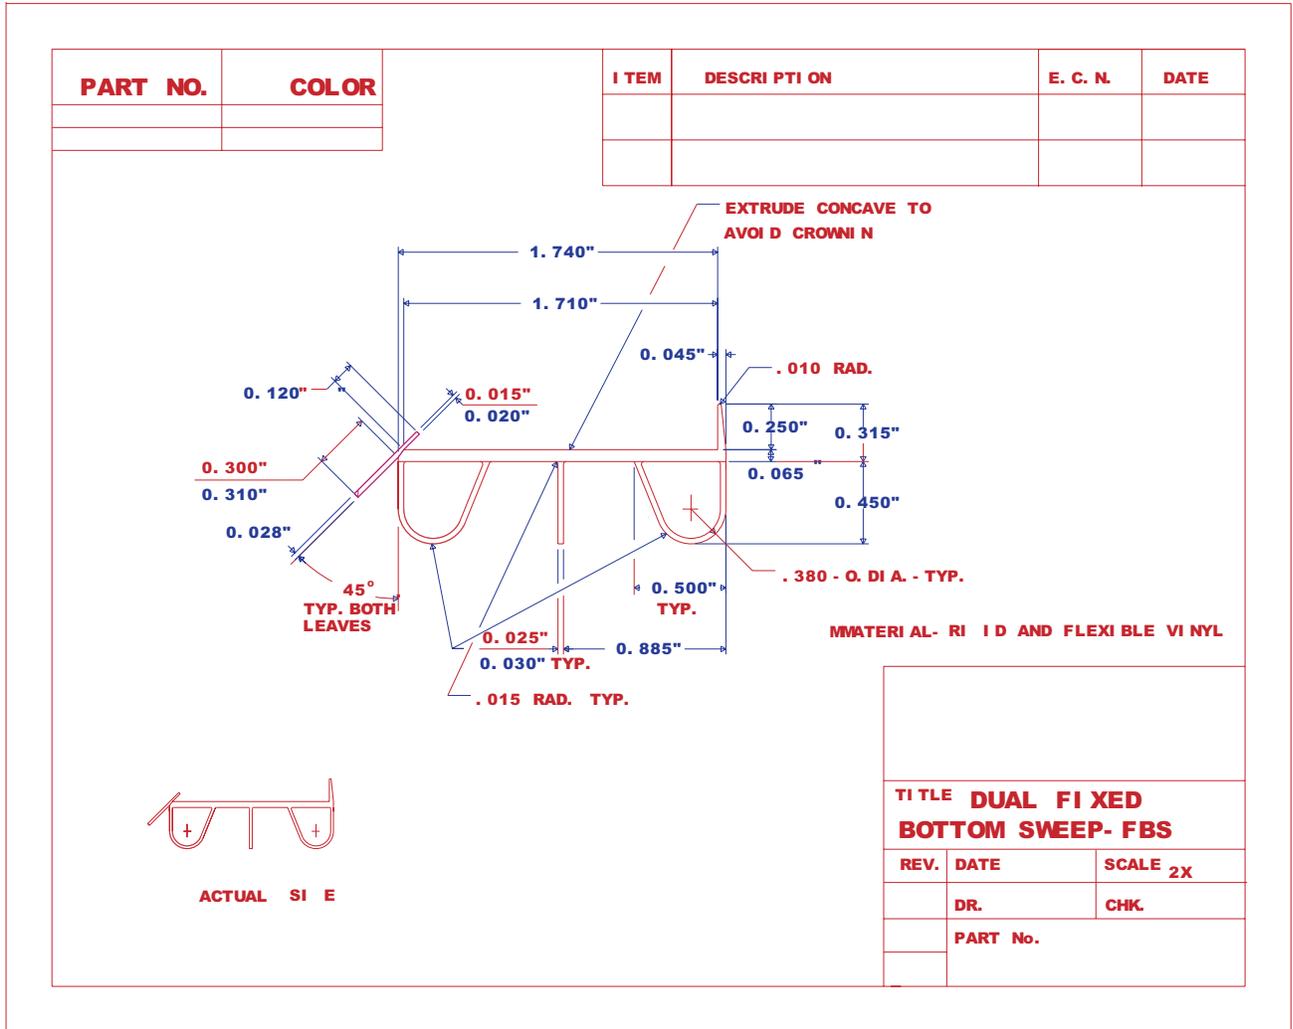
6-Panel Bottom Sweep.dwg (\* PATENTED DRAWING)
